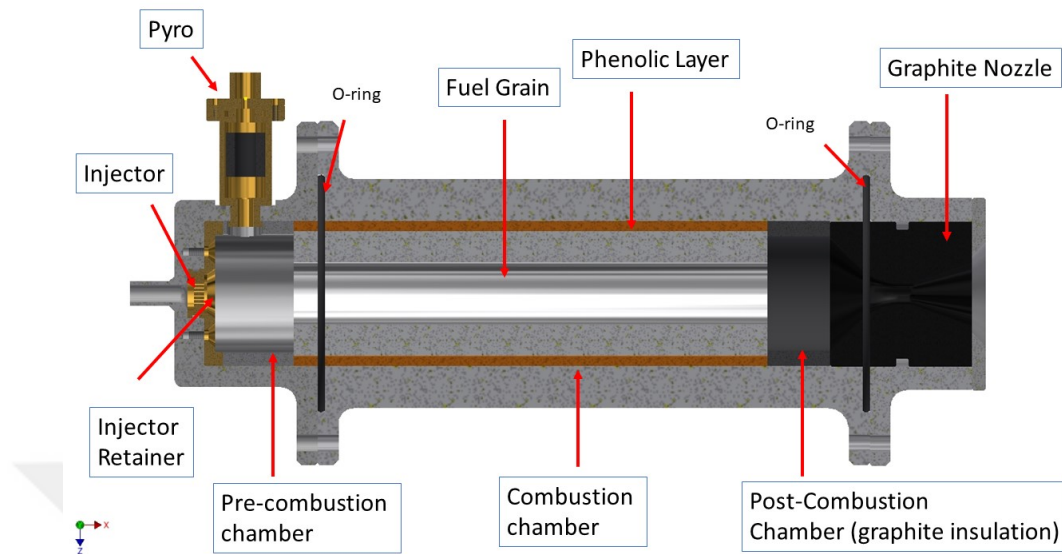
Mars Hybrid Rocket Motor Lay-out
